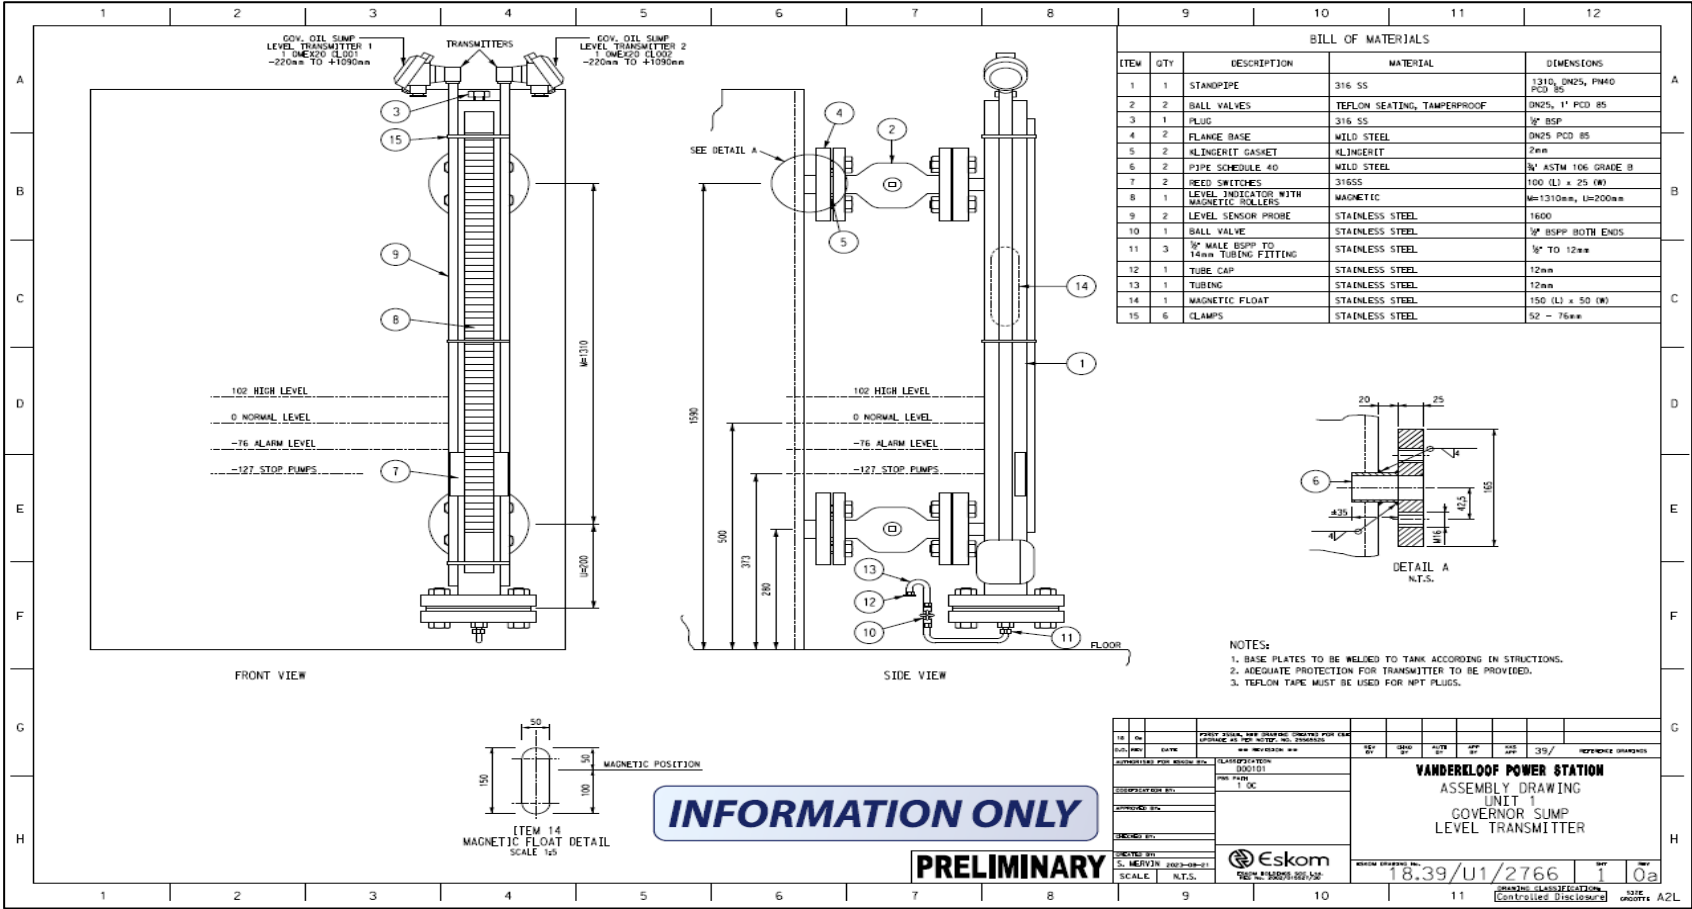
Assembly Drawing Stand-pipe Level Transmitter for Oil Sump
